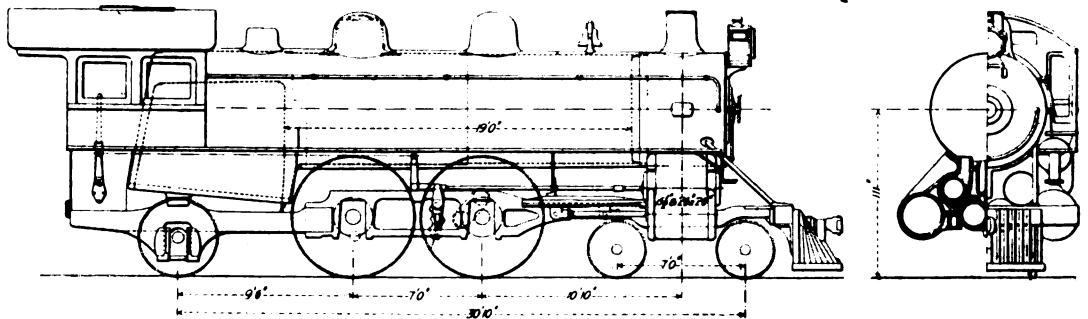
"ATLANTIC" TYPE ENGINE WITH FOUR COMPOUND CYLINDERS IN LINE.
